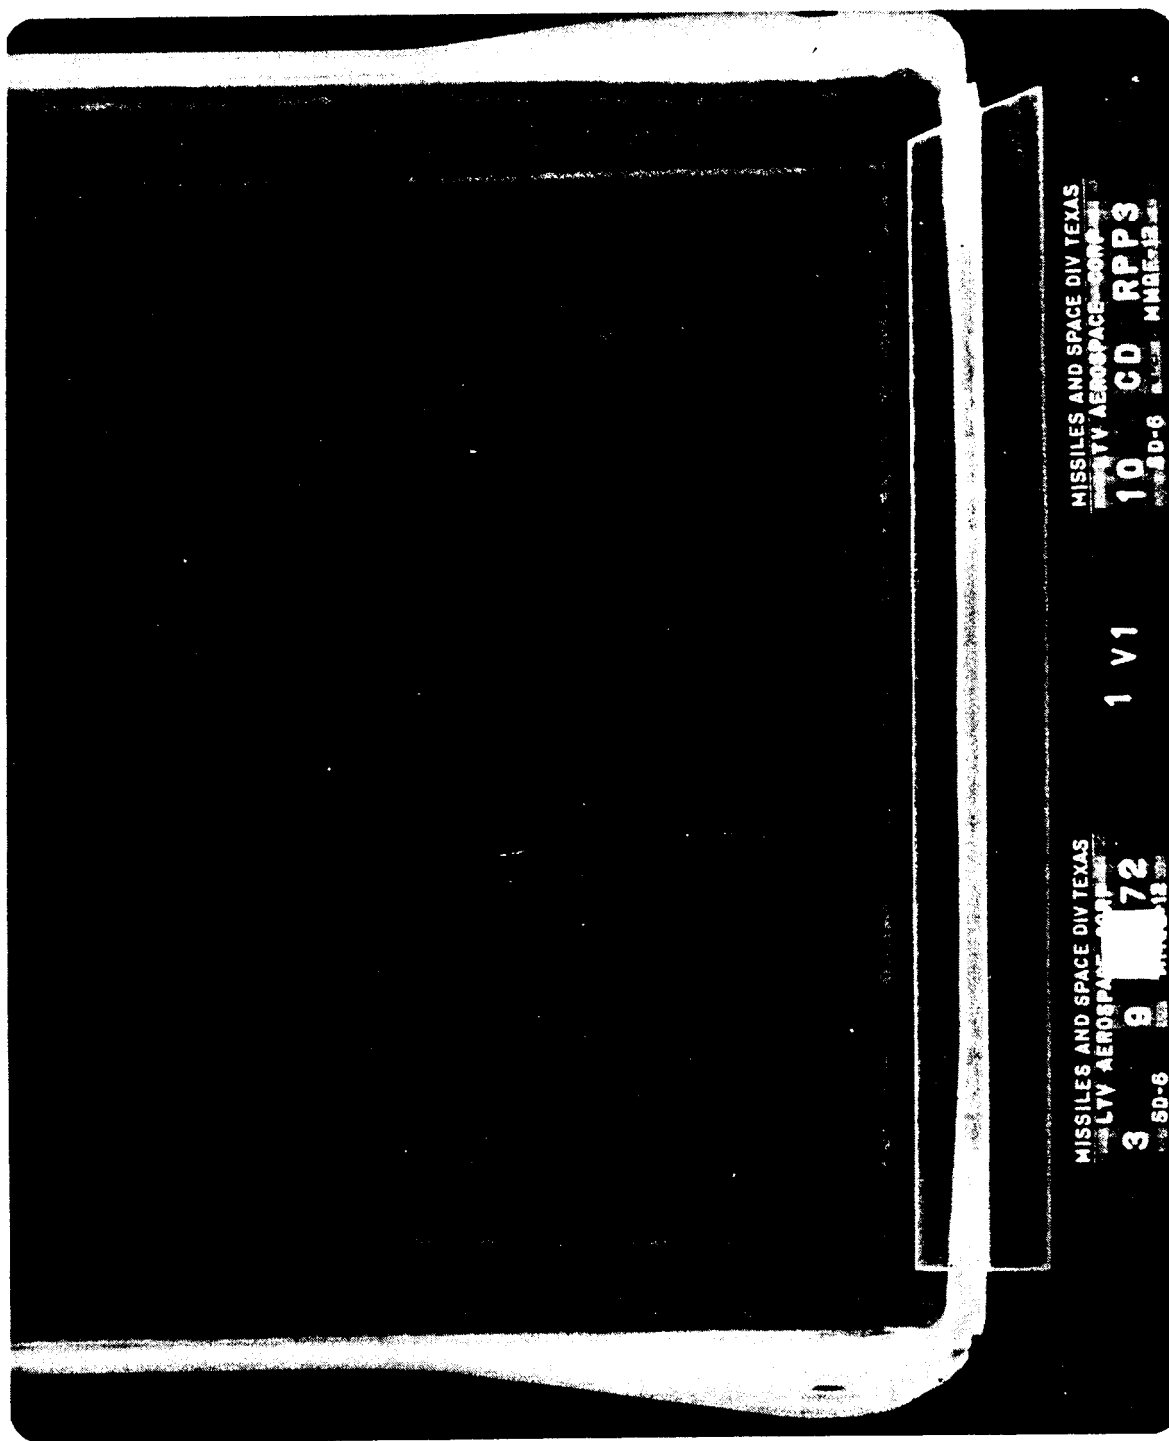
X-RAY VIEW OF LEADING EDGE S/N-1 AFTER COATING
